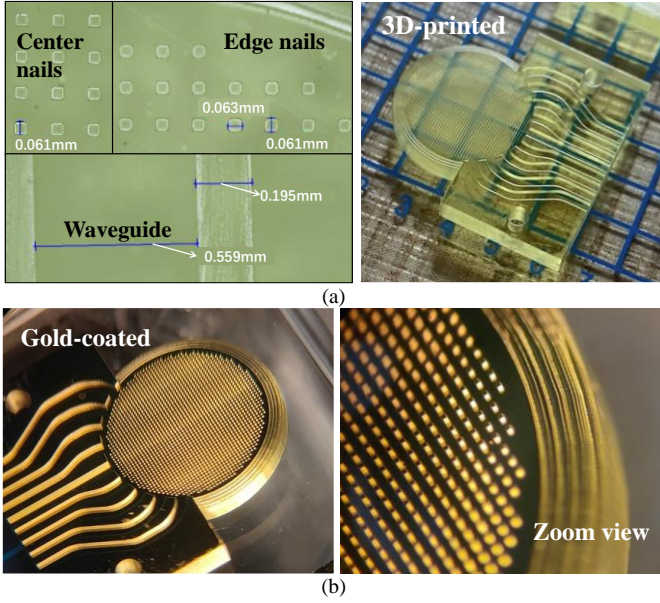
Photographs of the antenna: (a) As printed and (b) after gold-coating.
